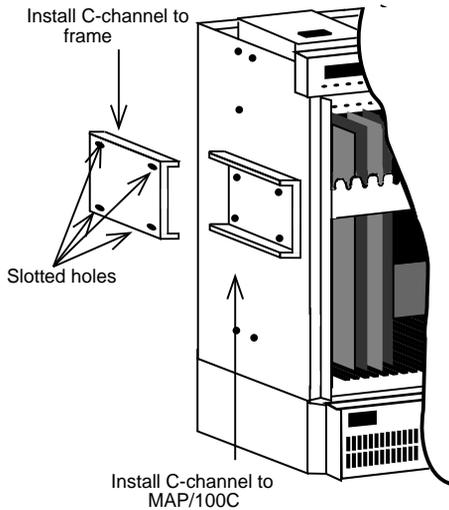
Installing Mounting Brackets onto the MAP/100C
